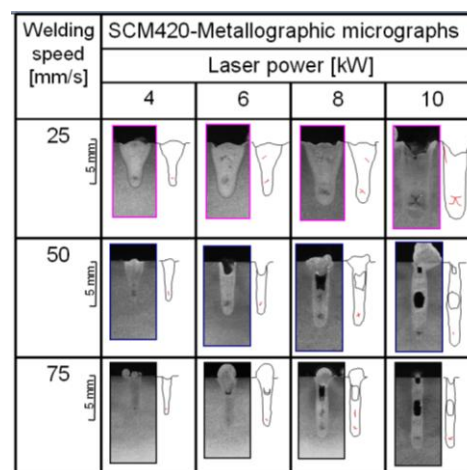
Cross sections of SCM420, BOP welds
